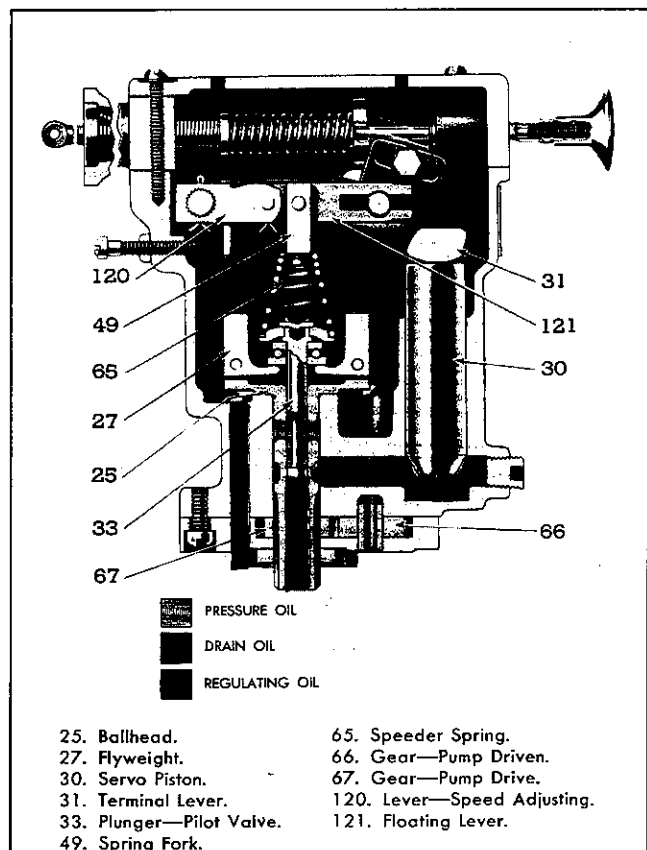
Stable Position of Governor Mechanism When Load on Engine Is Constant.
